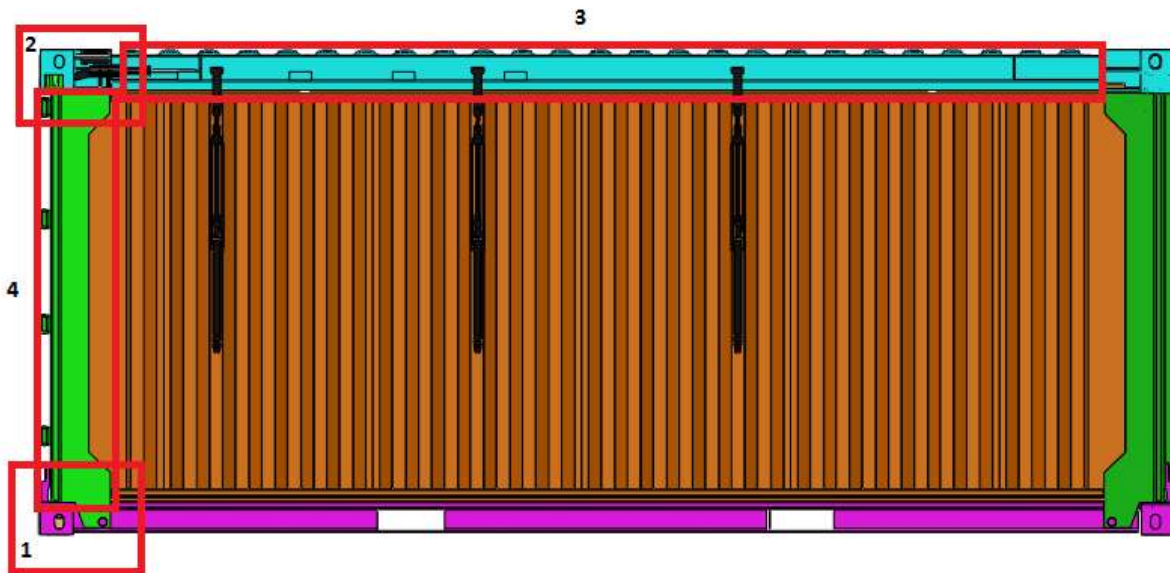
Areas where still design challenges remain in the initial design, indicated by a red border. 1) lower base corner; 2) roof pocket; 3) top side rail stiffener; 4) end wall cornerpost .
